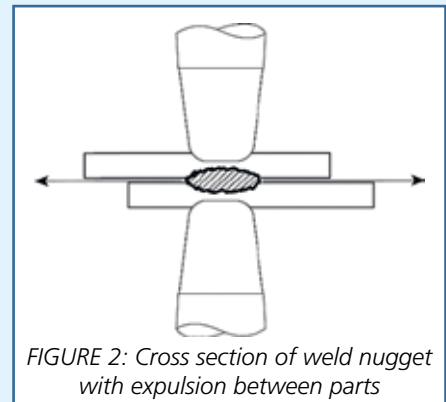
Cross section of weld nugget with expulsion between parts
